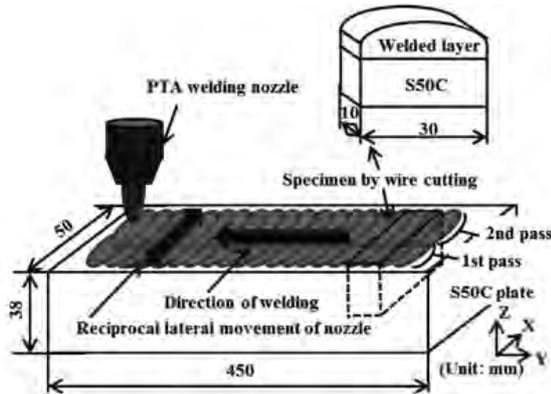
Schematic illustration of specimen manufacturing by PTA-welding and wire-cutting
